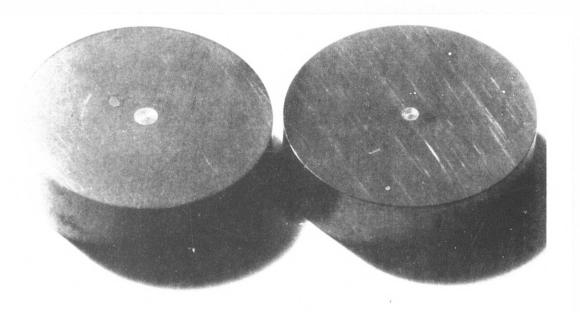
Specimen pair coated on upper face with a sputter-deposited tungsten-carbide and cobalt coating. (The center region of the specimen as shown is depressed and not part of the wear surface.)
